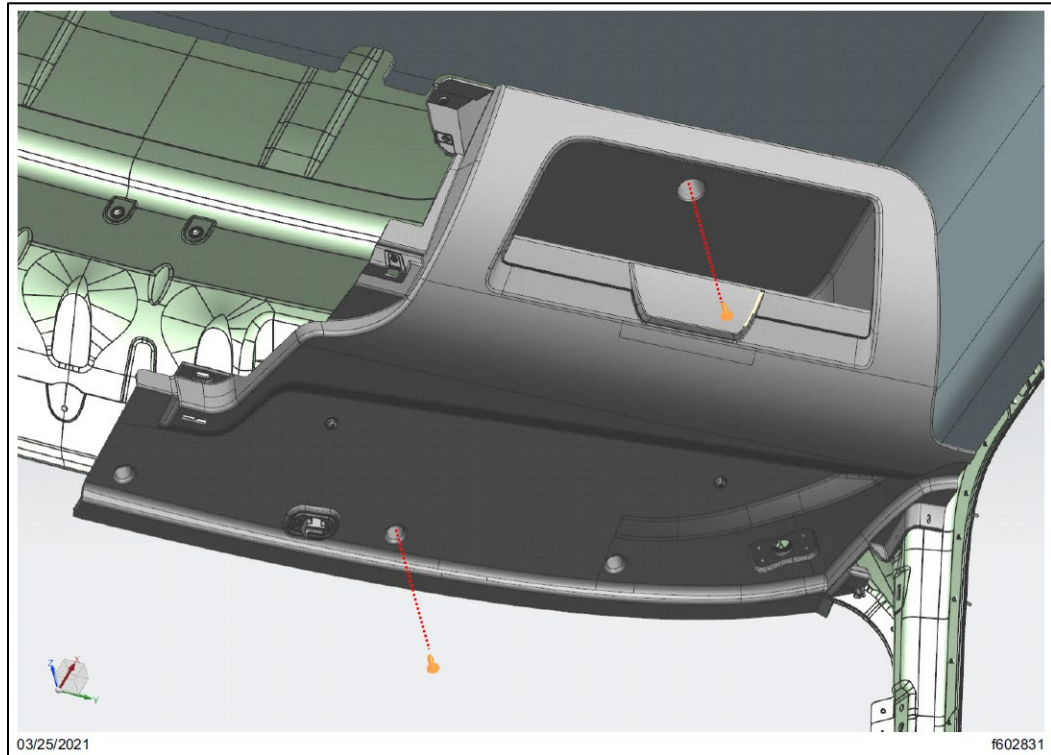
, Fasteners Attaching RH Side Overhead Storage Cabinet to the Cab Roof
